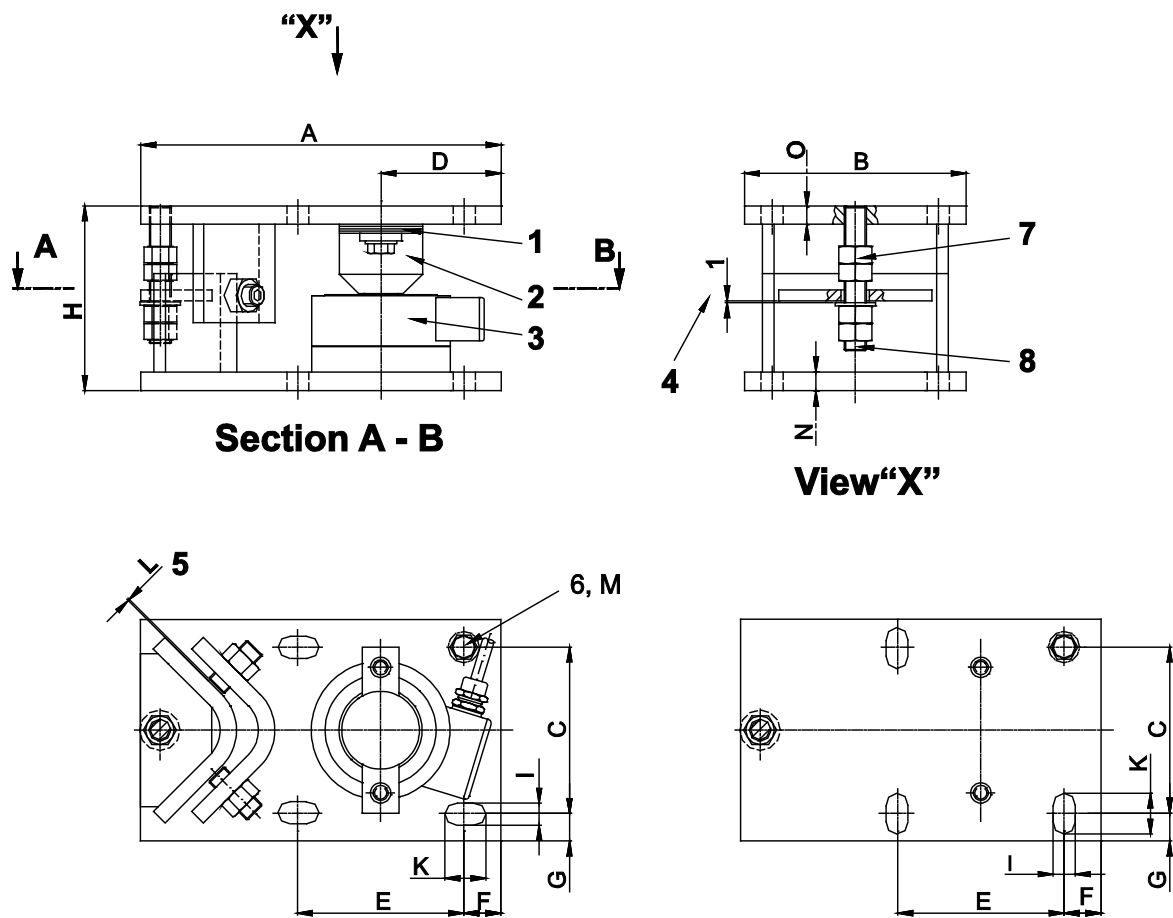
Installation drawing for the compact bearing DKM 0.25 ... 33 t
